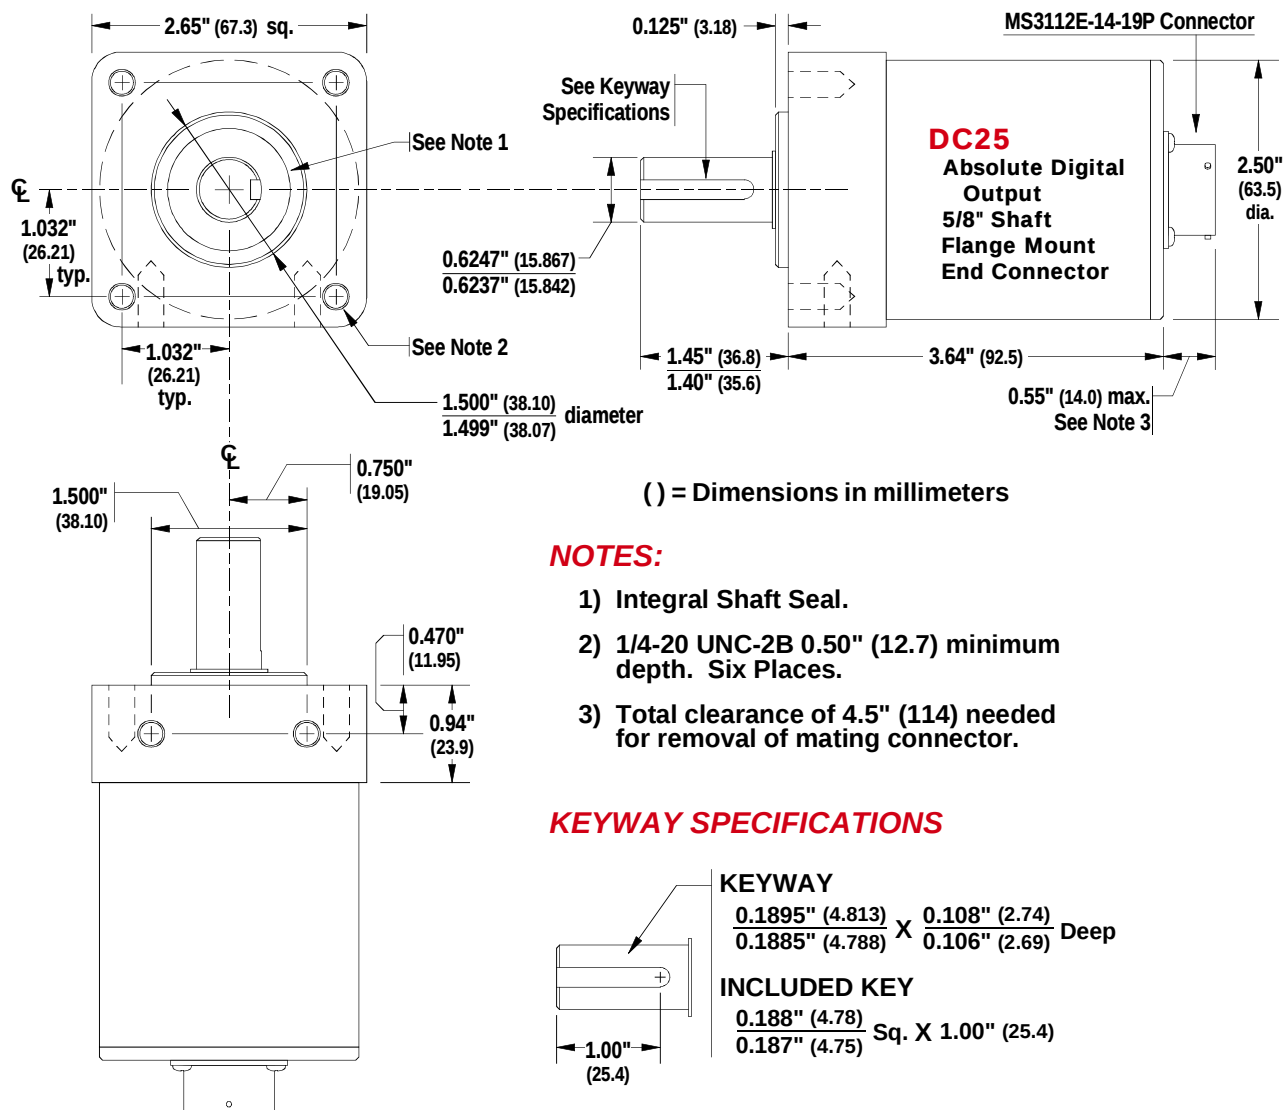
5/8" Shaft, Face Mount, End Connect Outline Drawing
